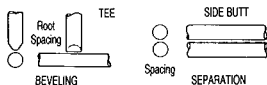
Designs for achievement of completely penetrated weld (high-temperature service).
